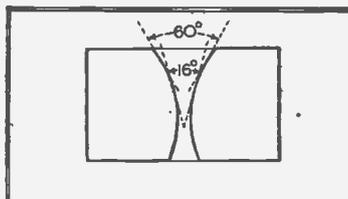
Sectional sketch of wire drawing die recommended for tungsten.
